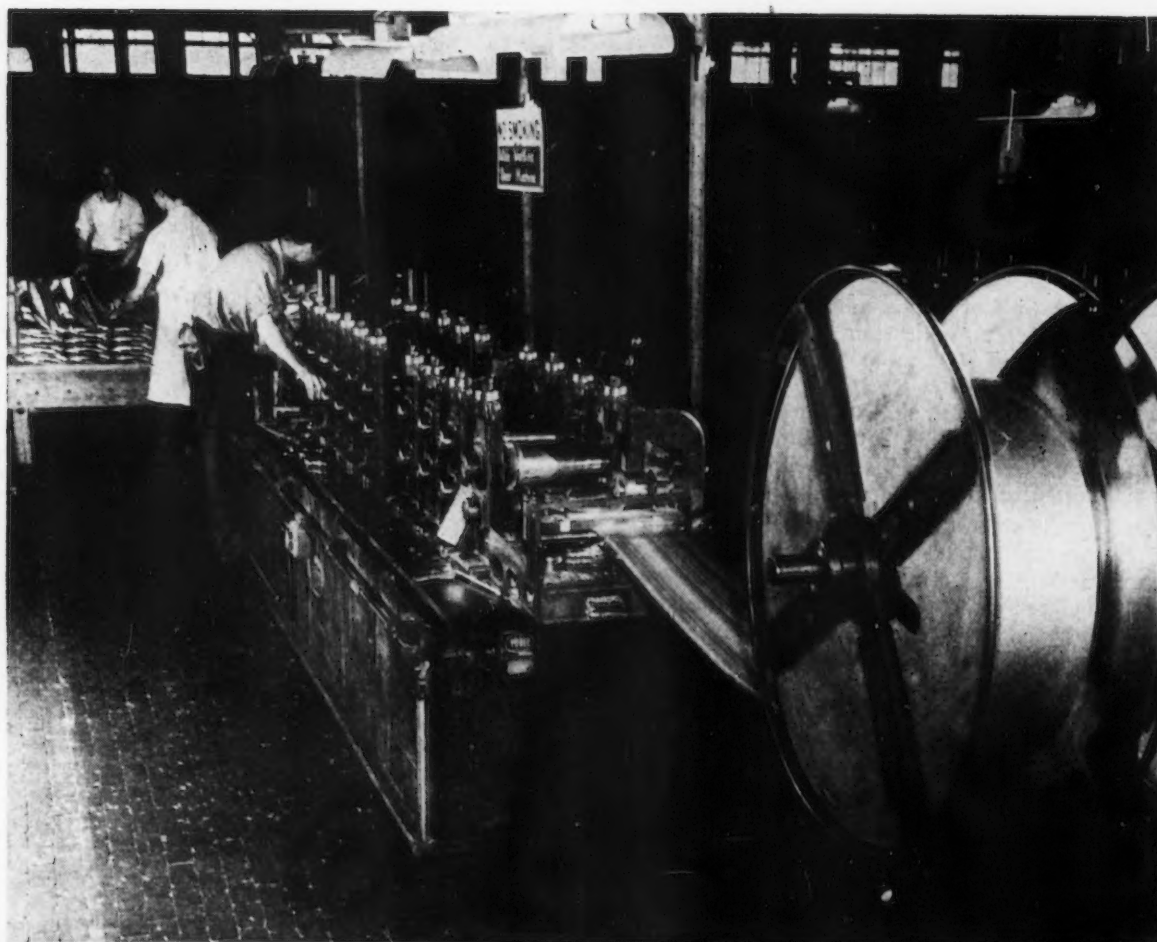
Cutoff blades in the machines forming the siding are actuated by a photoelectric eye.
